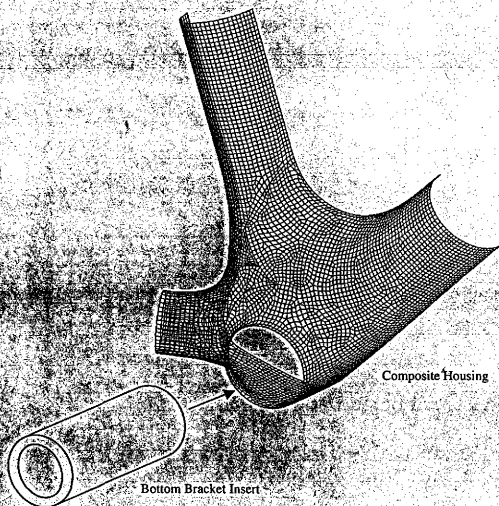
Exploded View Schematic of Bottom Bracket Insert and Composite Frame Half
